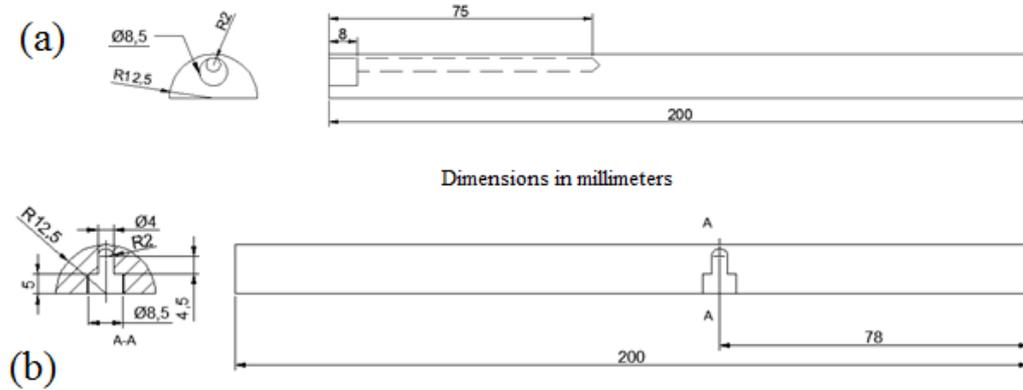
The test specimen geometry showing the pressurized cavity. (a) Type 1; (b) Type2.
